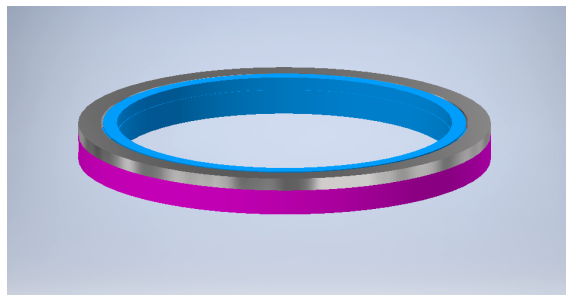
CAD rendering of bearing design with aluminum sealing surface (silver). This sealing surface is attached to the outer bearing race (pink).
